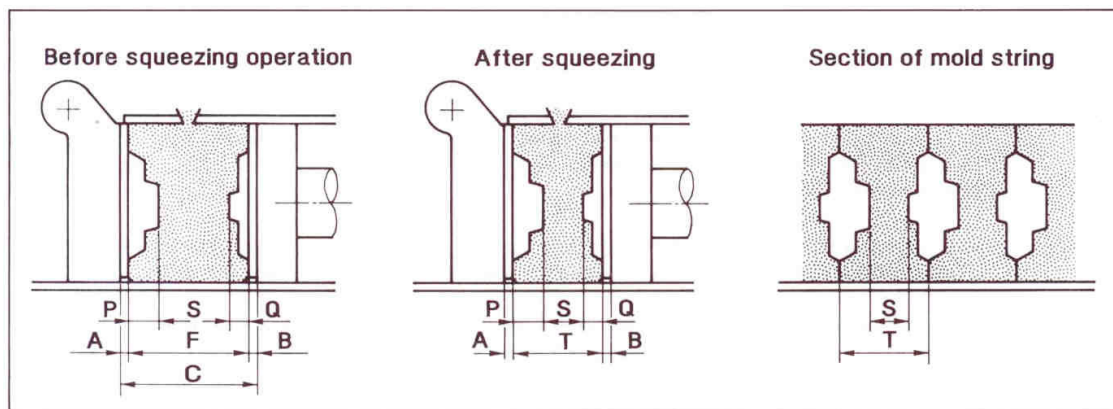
Basic dimensions of mold before and after squeezing.
